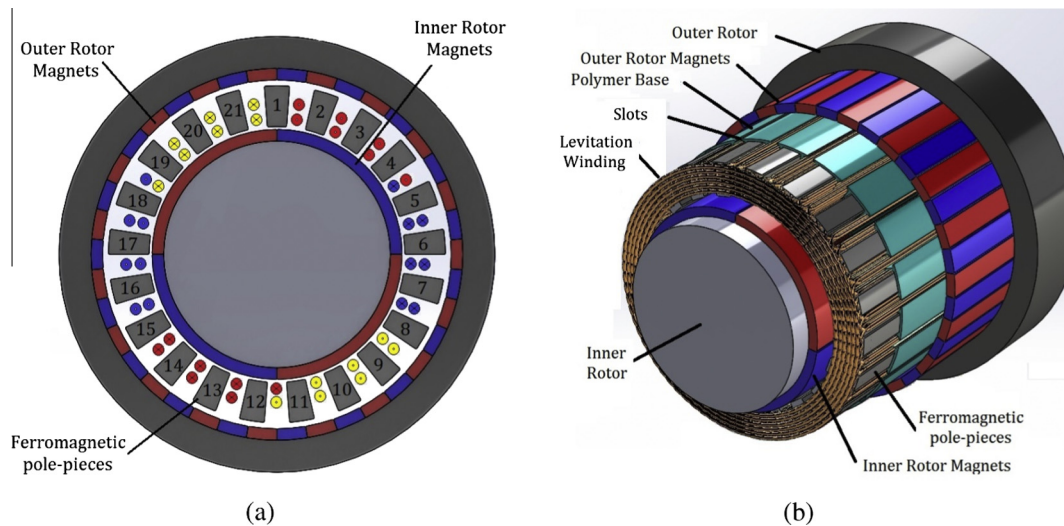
Magnetic planetary gearbox. (a) Cross-sectional view and (b) 3D view.
